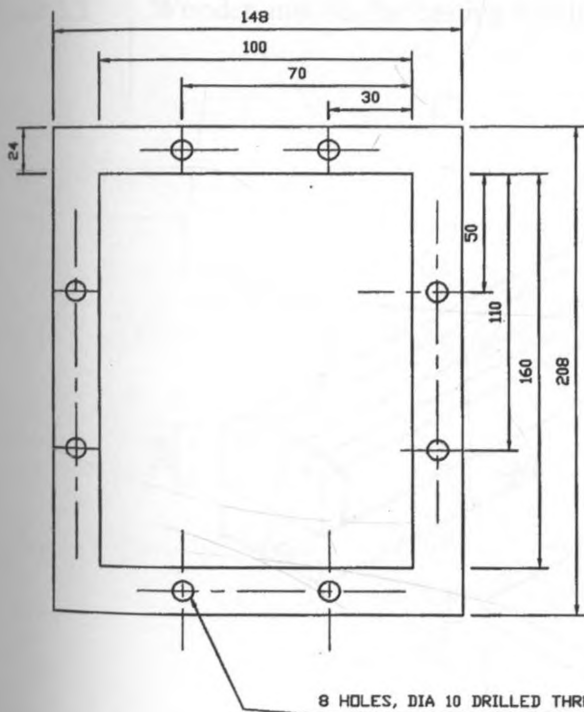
Steel moulds for casting Sisal/Epoxy tensile test specimens
